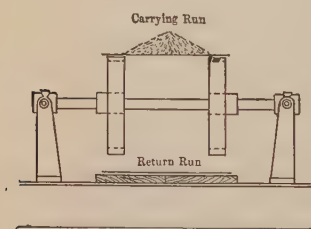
Sandvik Flat Steel Belt Conveyor.
